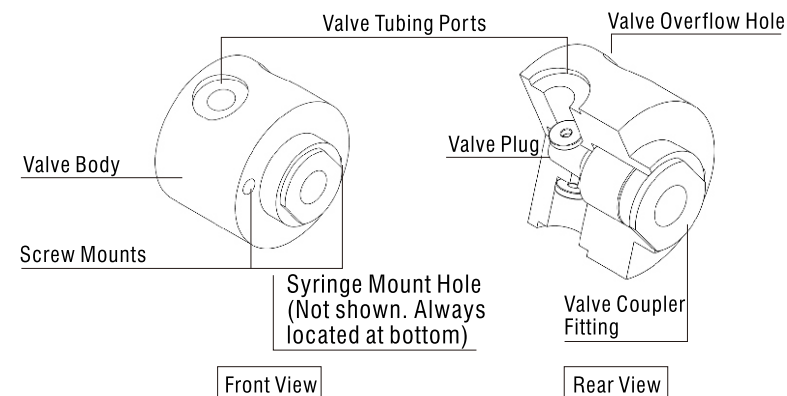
Valve Replacement (3-Port Valve Shown)
